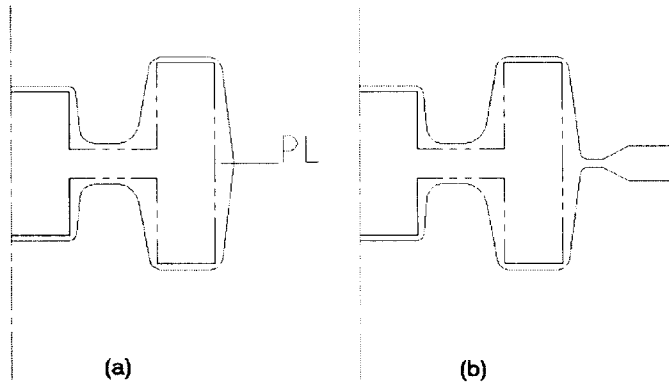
Output of finisher design: (a) finisher design, (b) finisher die design
